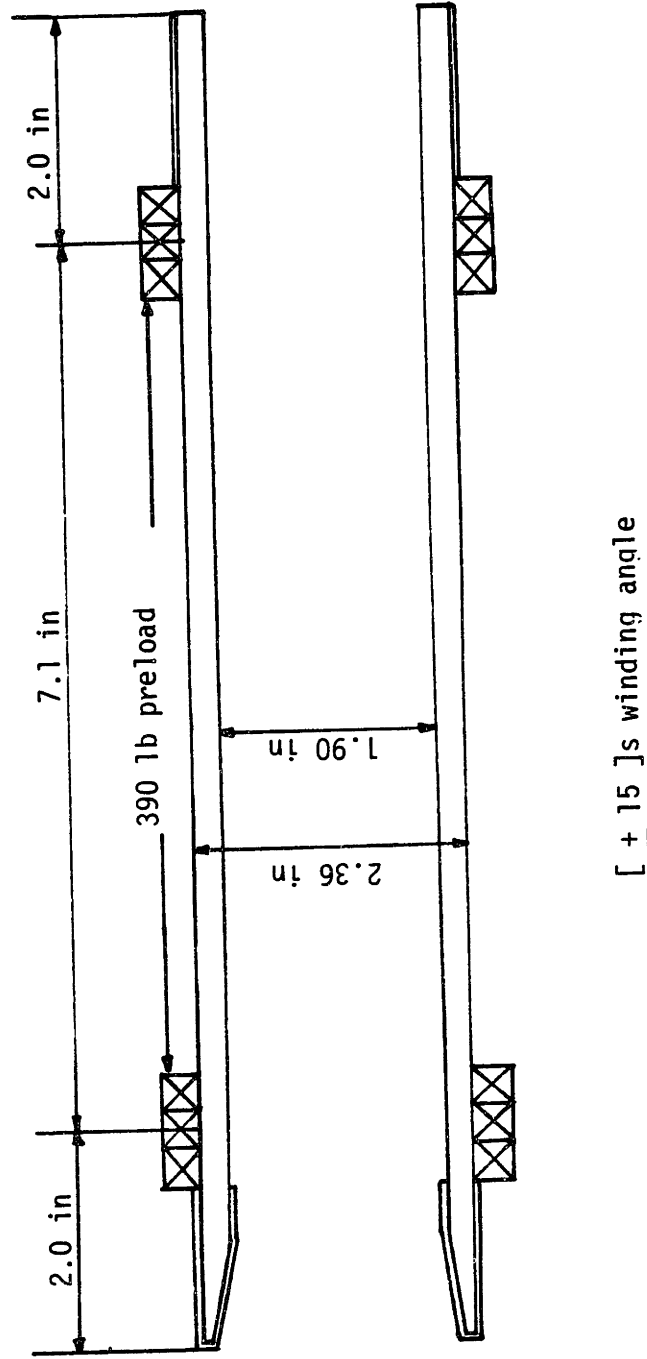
Schematic Drawing of the Optimally Designed Graphite Epoxy Composite Spindle Bearing System
